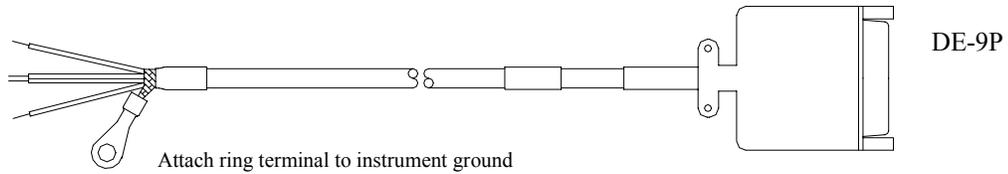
, Model 550/570 to PSC Laser Scanner Adapter Cable
